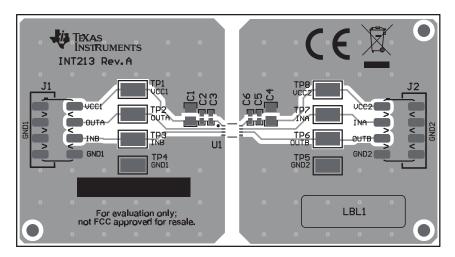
ISO6521REUEVM PCB Layout - Composite Top View
